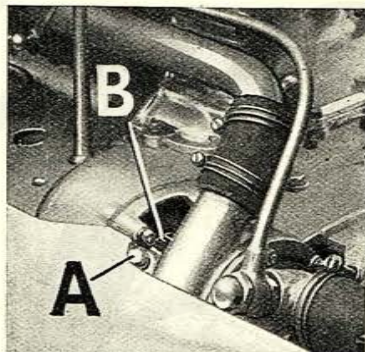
Showing the Water Pump and Gland which should be packed when required to prevent leakage.
